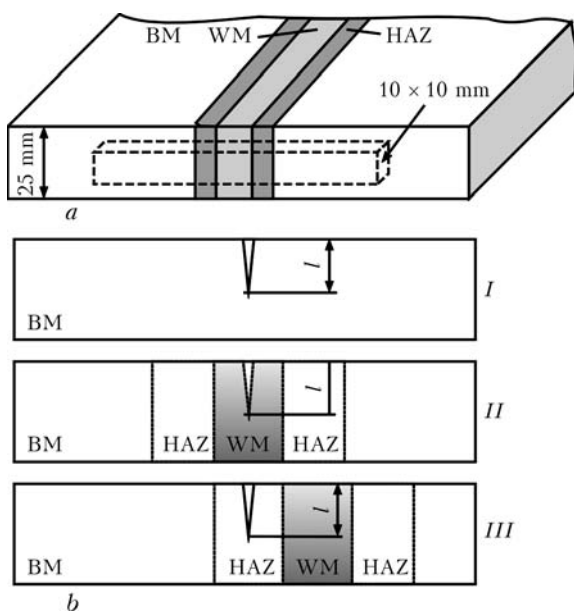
Scheme of the high-strength RQT601 steel weld [9] and beam specimen cutoff (a), and beam specimens for crack growth resistance investigations of weld components: base (I), weld (II) and HAZ (III) metal (b)
